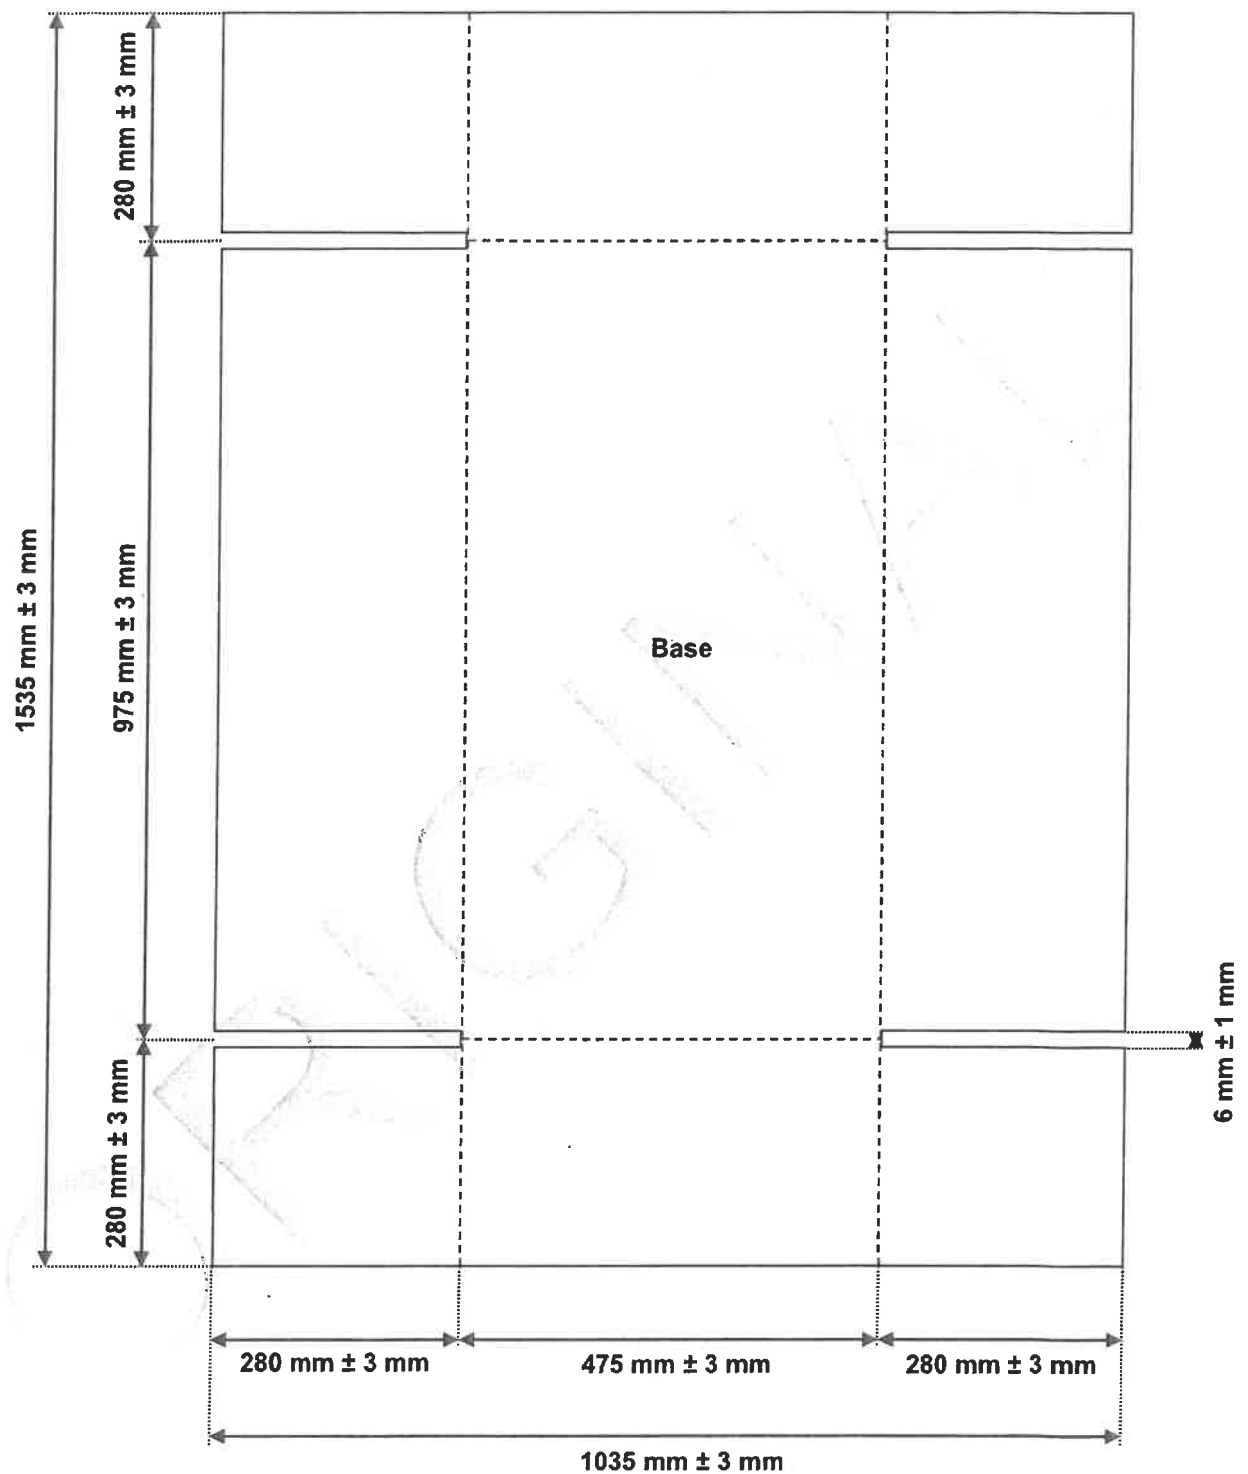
Dimensions of the base component of the telescopic board box (flat measurements)
